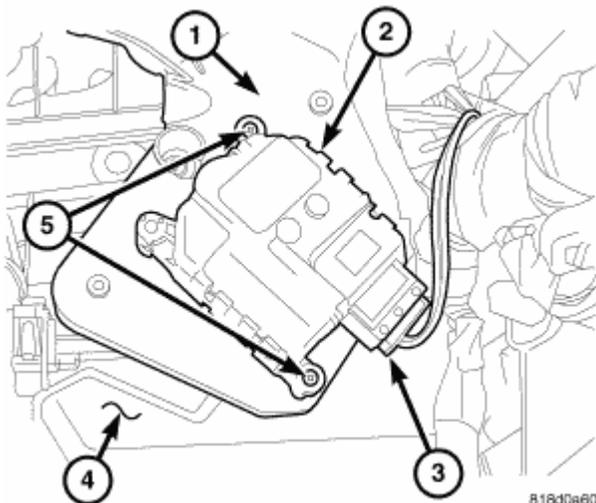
Identifying Actuator Mounting Bracket, Blend Door Actuator, Wire Harness Connector, Air Distribution Housing & Screws
